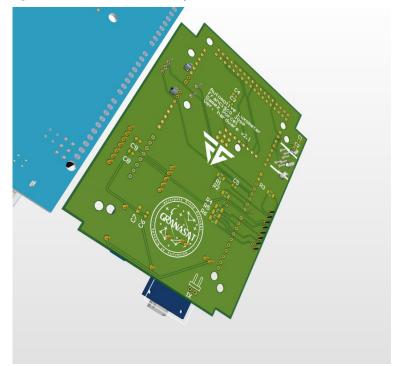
Bottom view of the PCB v2 without Arduino board
